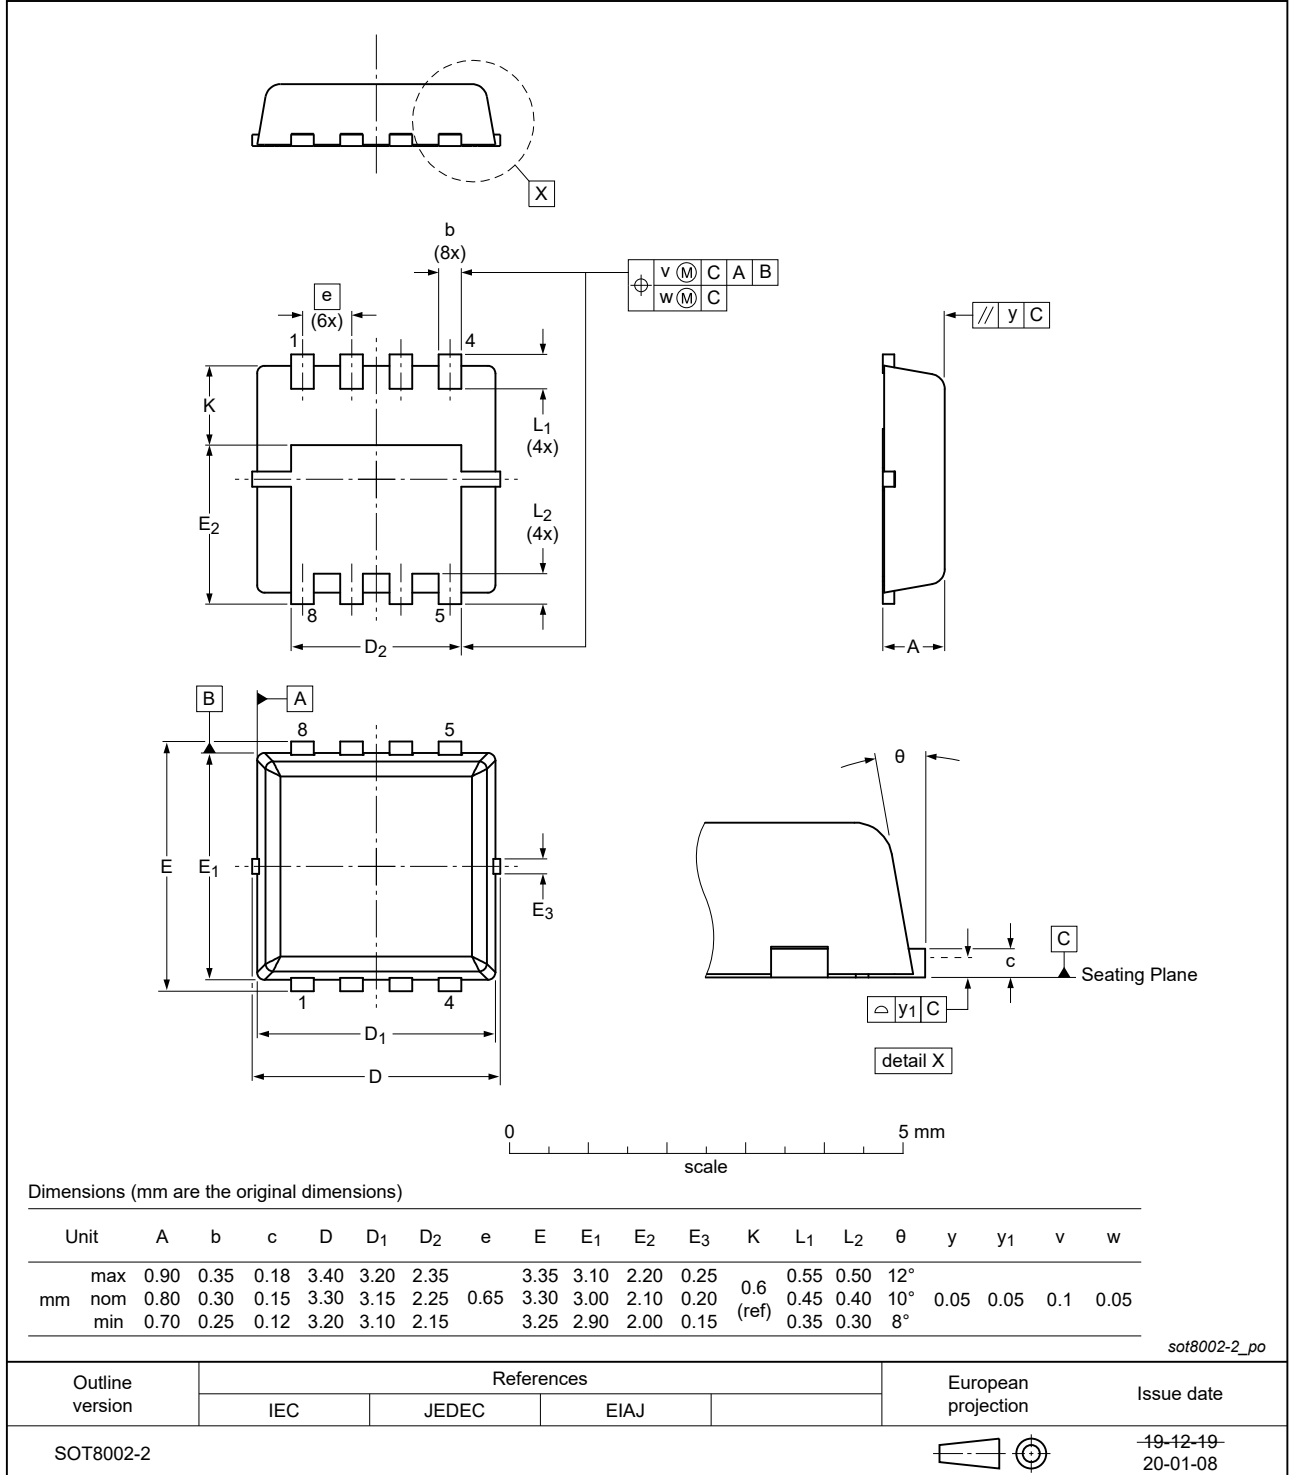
Package outline MLPAK33 (SOT8002-2)
